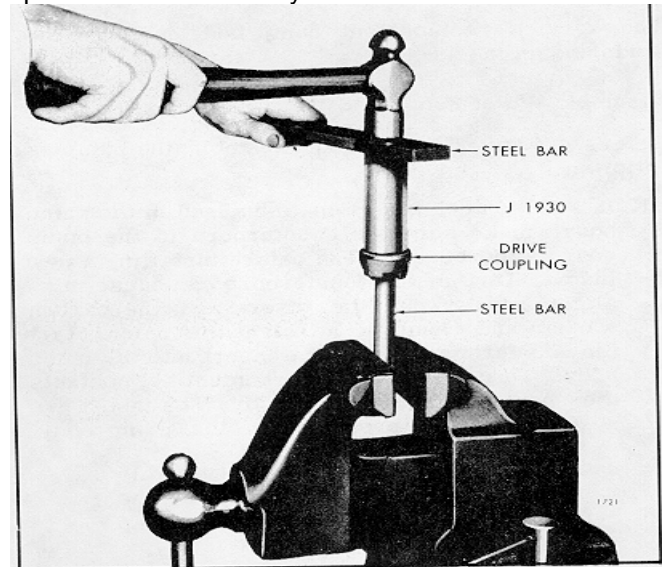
Removing Water Pump Drive Coupling from Shaft with Tool J 1930
